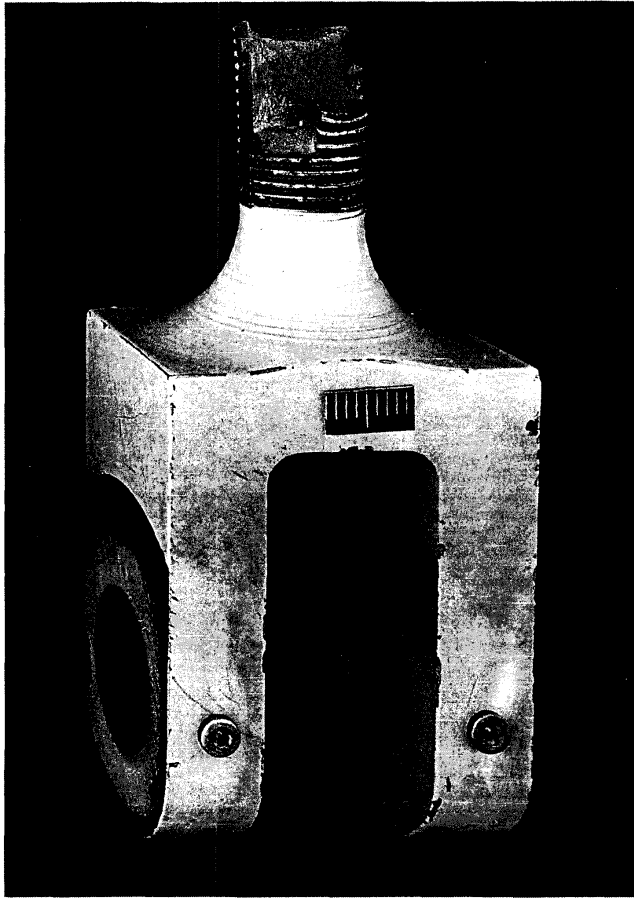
General view of the broken L/H clevis rod from the aircraft reg. LN-MOE. The machined groove in the one side of the threaded portion is seen at the top of the photo.
